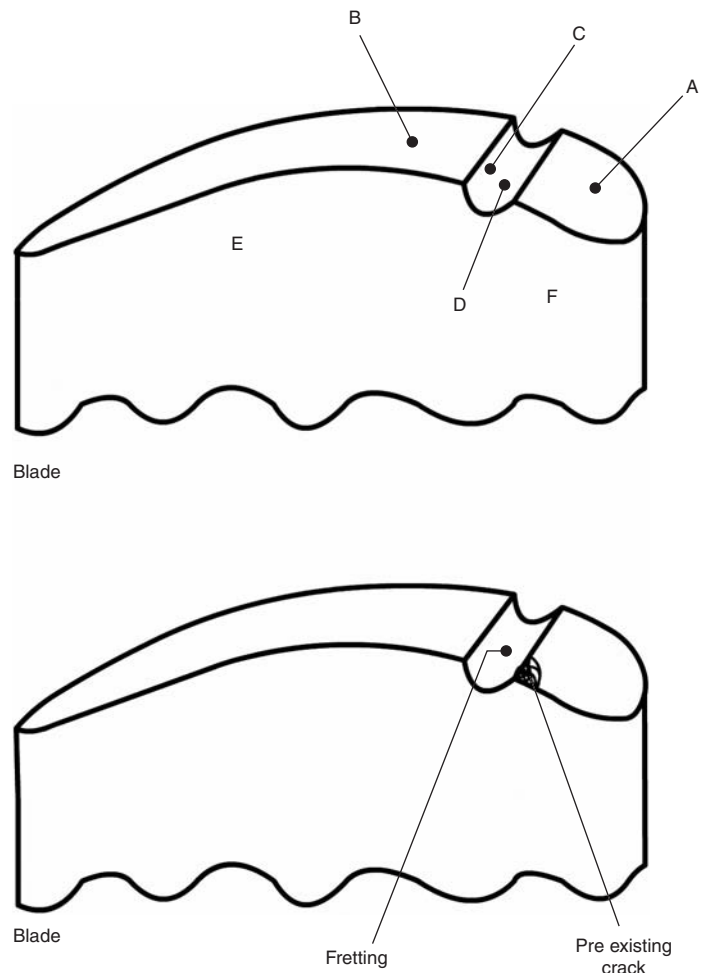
Schematic representation of fracture in the failed blade
